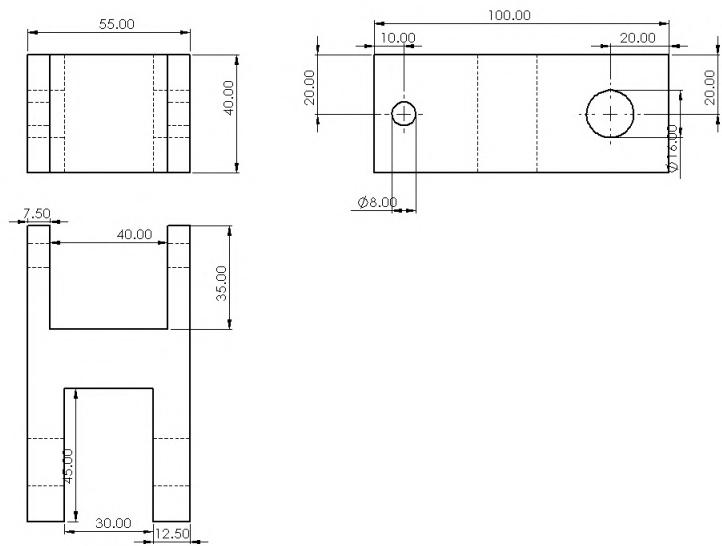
2D Drawing of the H-Link (All dimensions are in mm)
